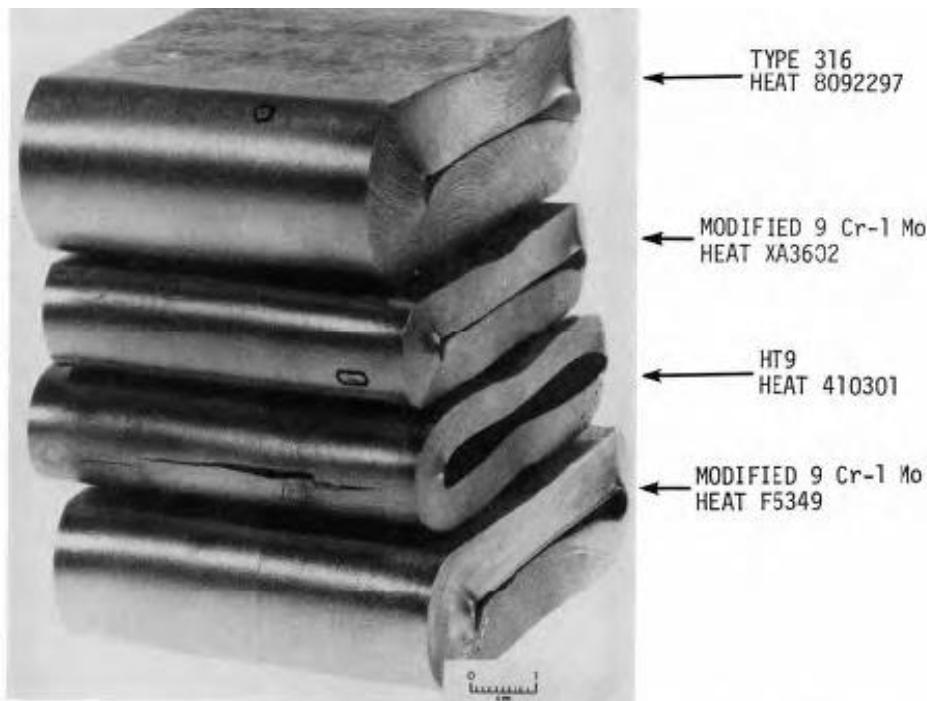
Flattening test behaviour of different steels used for the fabrication of furnace tubes [17]
